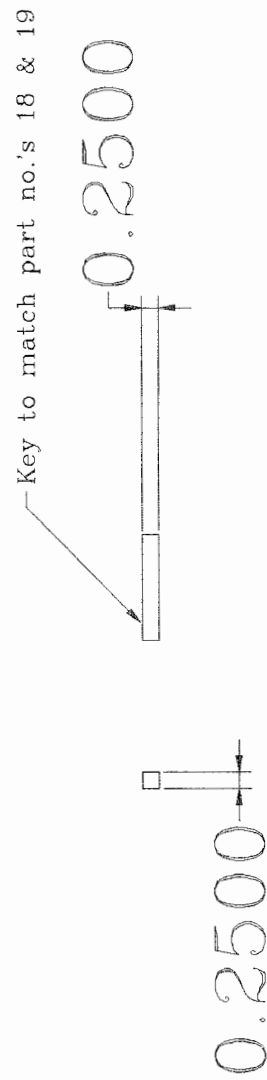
Part No. 20 LIDAR and RADAR Keys for Shafts
